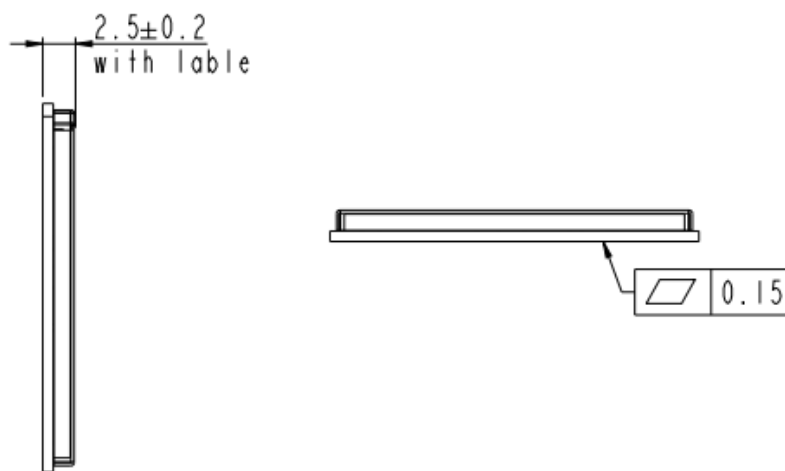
LE910R1 Mechanical Dimensions (Side view)
